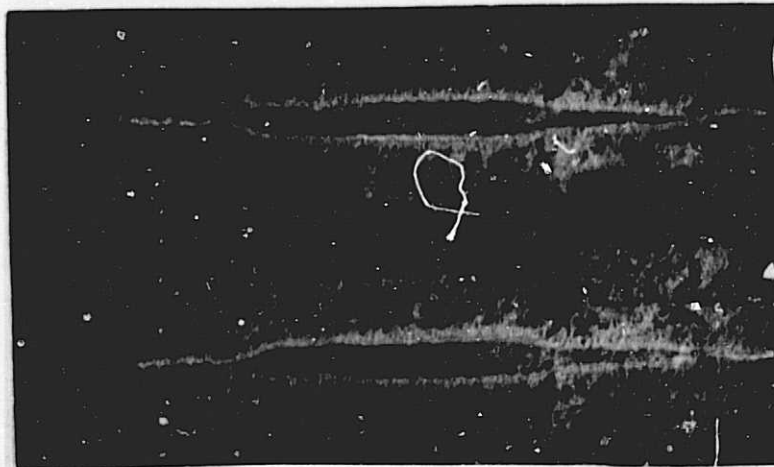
Radiograph and fracture surface macrograph of weld 2014-1.0-2A at IX
